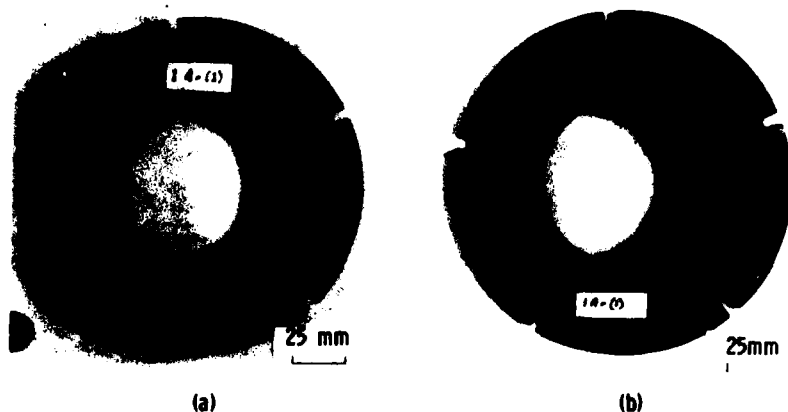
RBSN rear shroud after testing in the 10-kW turbo alternator with (a) front view and (b) rear view. This part was uncracked.
